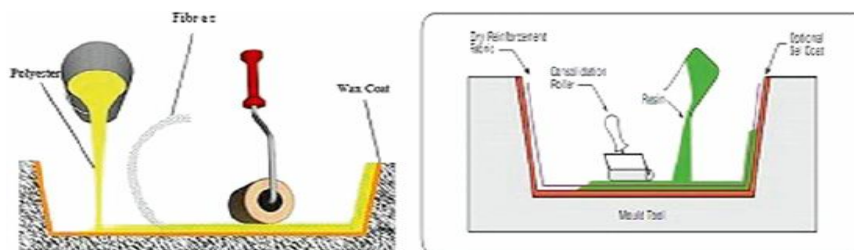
shows the hand lay up technique for the fabrication of composite materials.
